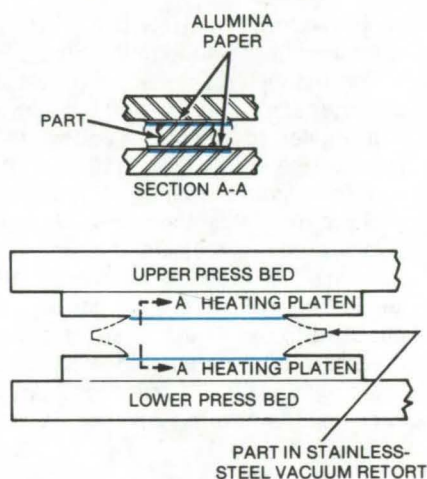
A Sheet of Alumina Paper is placed between the parts to be brazed and the heating platens of the press.
